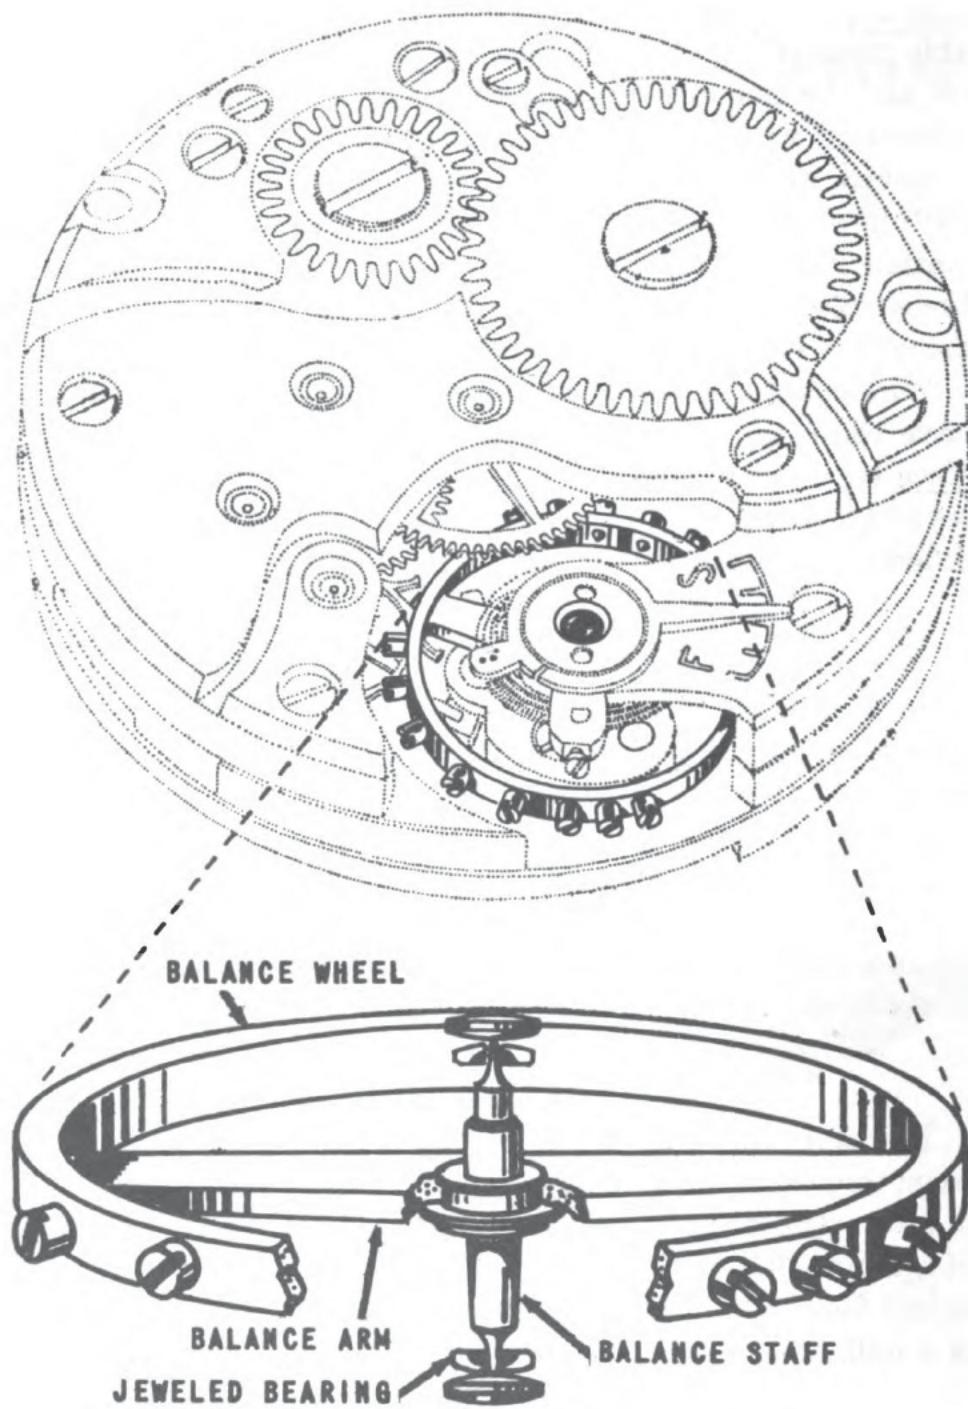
Cutaway view of balance staff fastened to balance arm.
